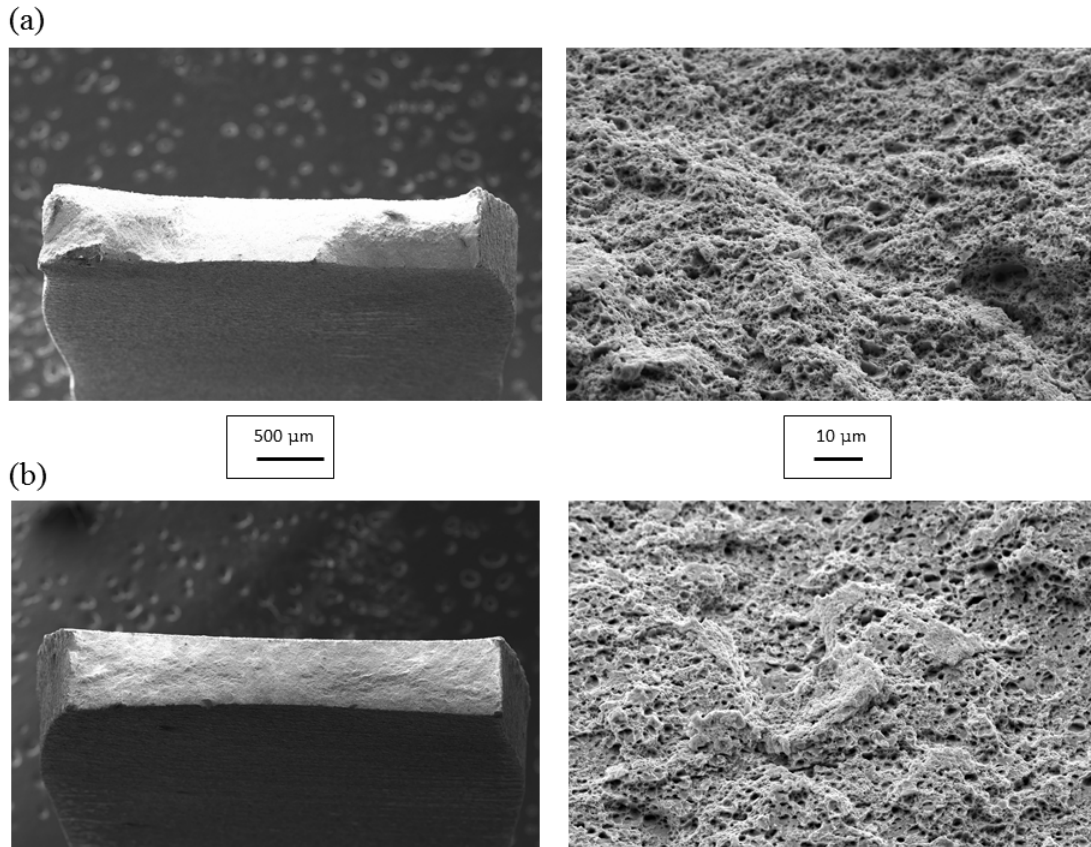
Fractography of MA956 fractured in (a) air at 150°C and (b) molten lead-bismuth eutectic at 150°C showing similar failure.
